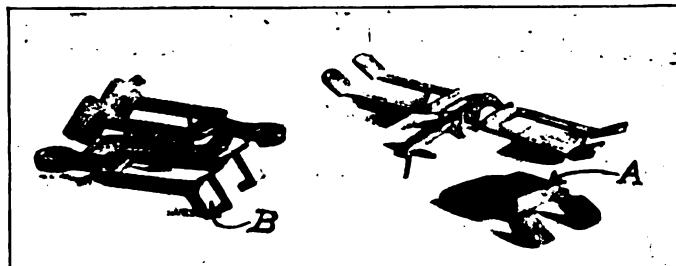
Original Gated Patterns, Showing First Attempt to Increase Production. They Require Dry-Sand Core for Each Casting. With Machine-Mounted Patterns, Entire Mold Is Made in Green Sand
